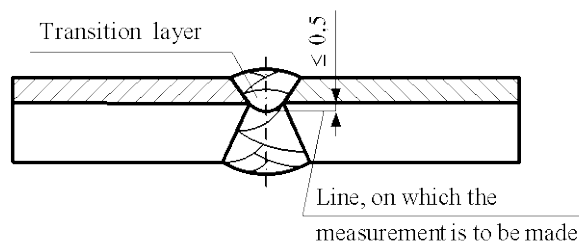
Butt weld hardness test specimen
